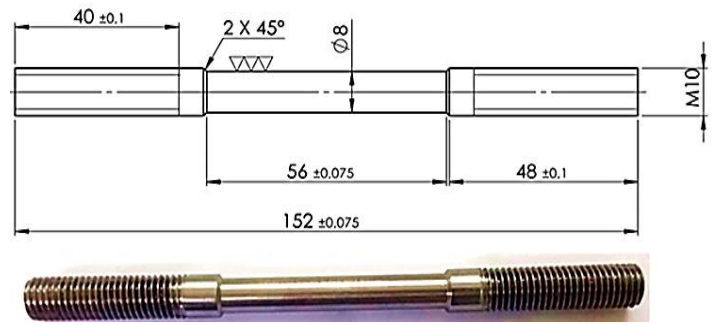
Shape and dimensions of tensile test specimen type in (millimeters); used according norme to DIN50125 [34].
